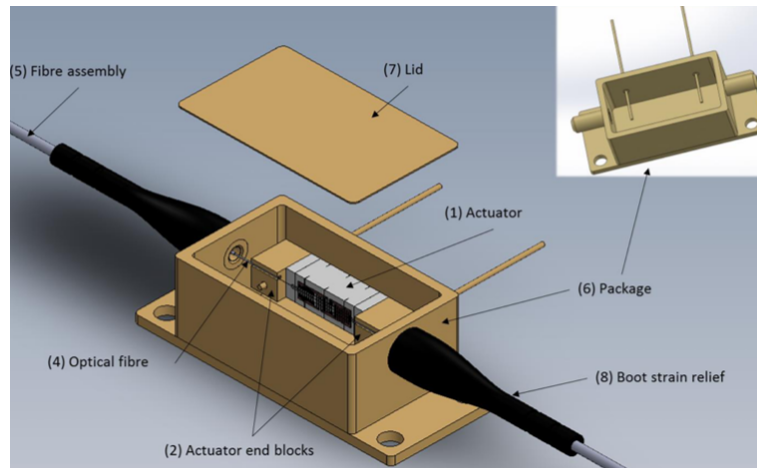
Packaged LVT assembly. Soldered wire leads from PS to package pins and package encapsulant not shown. Fig from [43]
